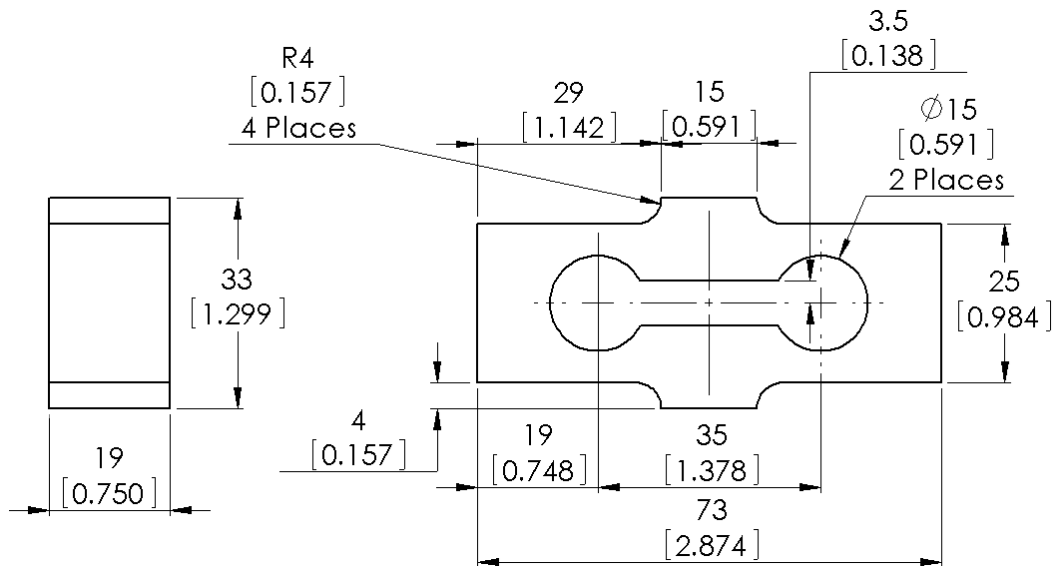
As designed drawing of the load cell used to determine the clamping loads. Dimensions are in mm [in.].
